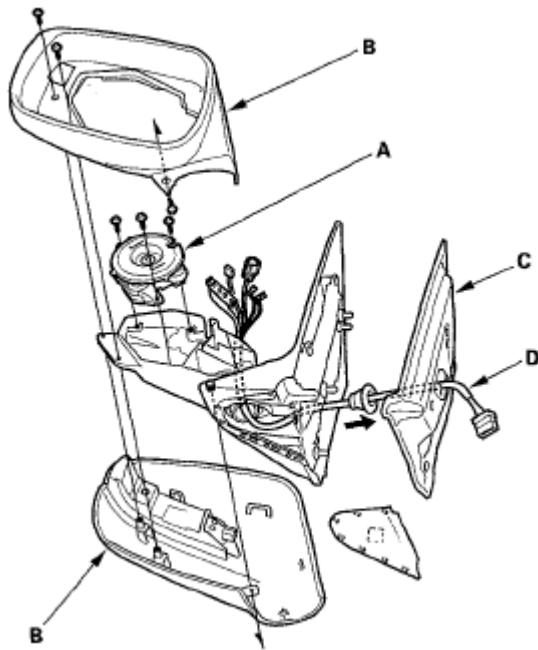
Identifying Actuator, Housing, Gasket And Harness
